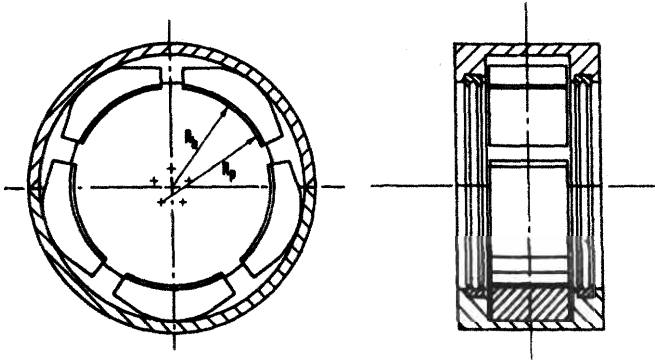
Dam type sleeve bearing. (Courtesy of Elliott Company)
